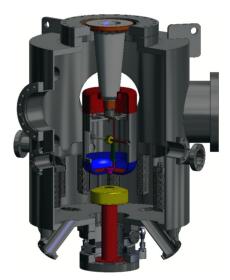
Technical drawing of the 200 keV photo source STEAM.
